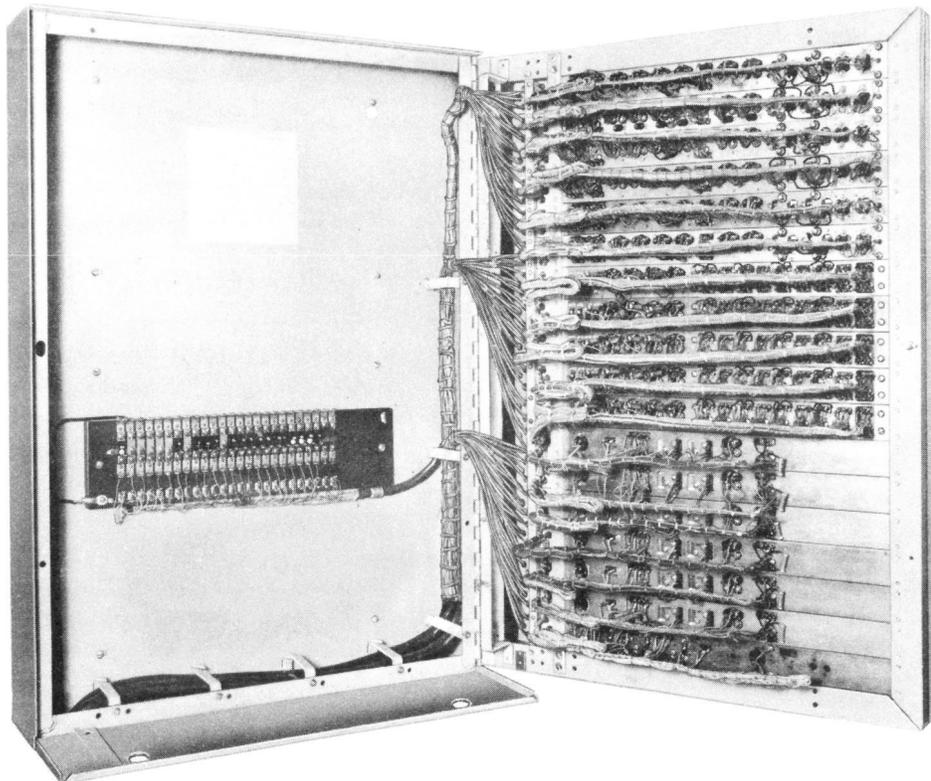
Rear View of 101-type Relay Equipment Showing a Direct Method of Cabling to Relay Units
